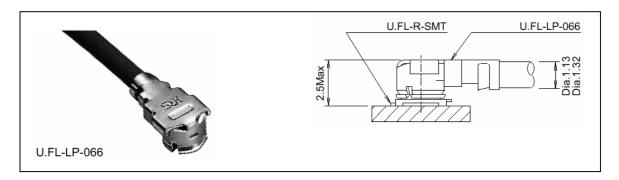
U.FL-R-SMT connector with U.FL-LP-066 plug
